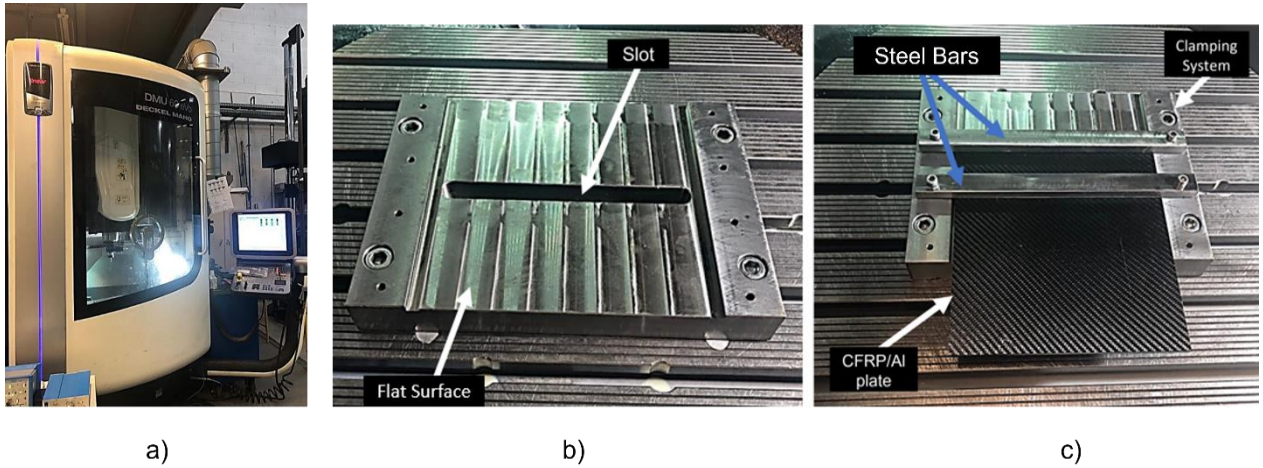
Drilling tests setup: (a) DMG Mori DMU 60 eVo CNC machine; (b) and (c) clamping system.
